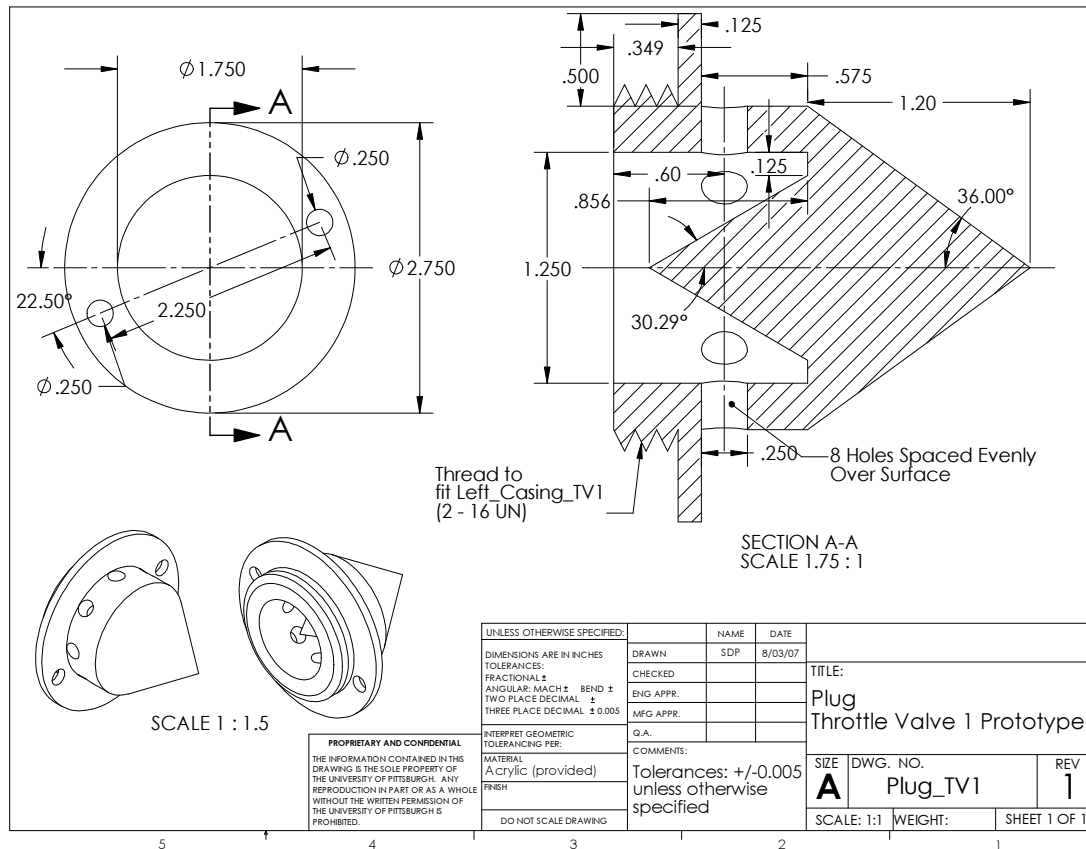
Barrel plug component drawing for barrel valve prototype (TV1).
